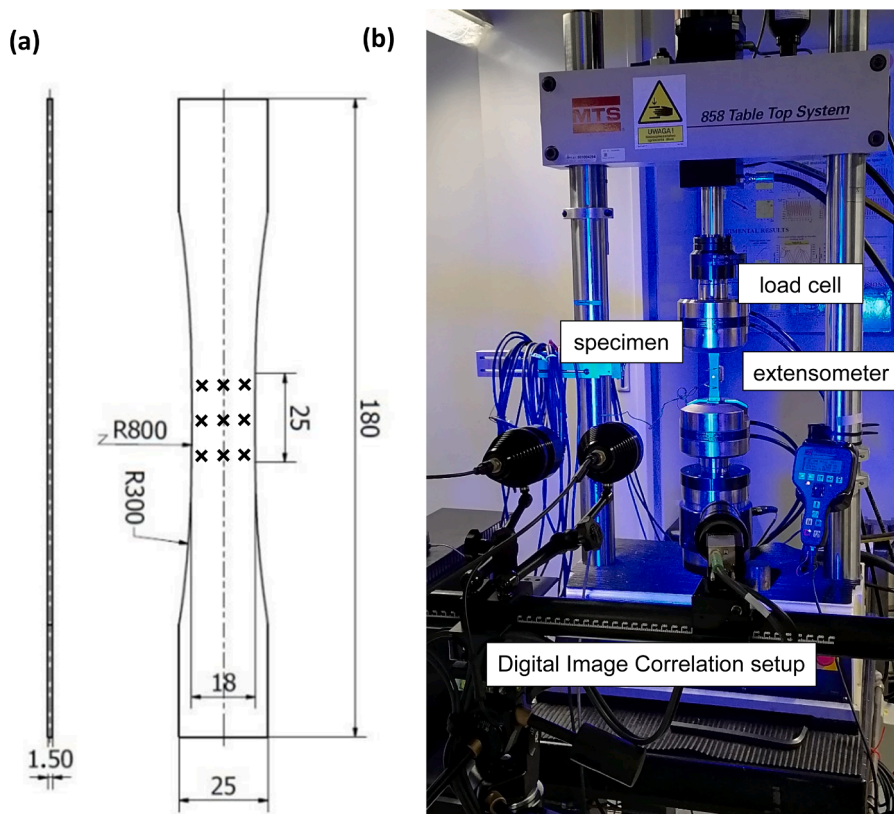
The engineering drawing of the fatigue specimen (a); testing setup consisting of MTS 858 machine and DIC equipment (b).
